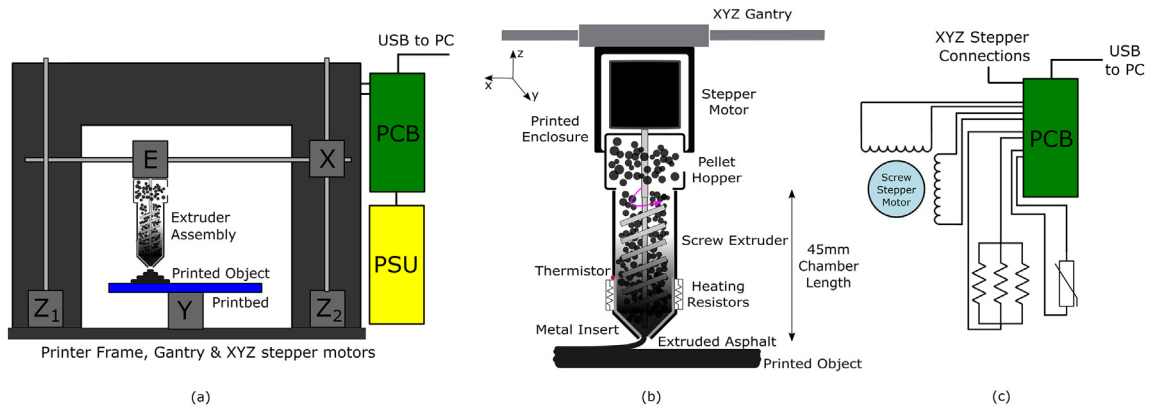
System design: (a) 3D printer, (b) the extruder design, (c) the control electronics.
